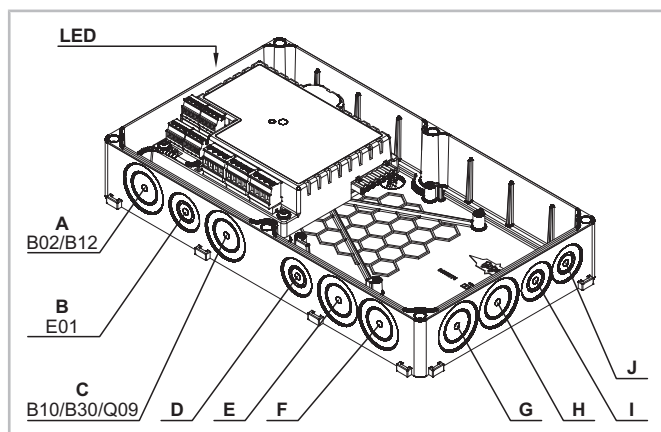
Assignment of the cable bushings into module housing for compressors of housing size 5 and 6, smaller housing sizes similar.
